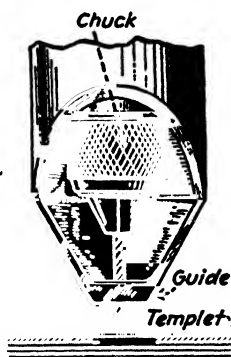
Drill guide that locates the drill by larger holes in the templet.
